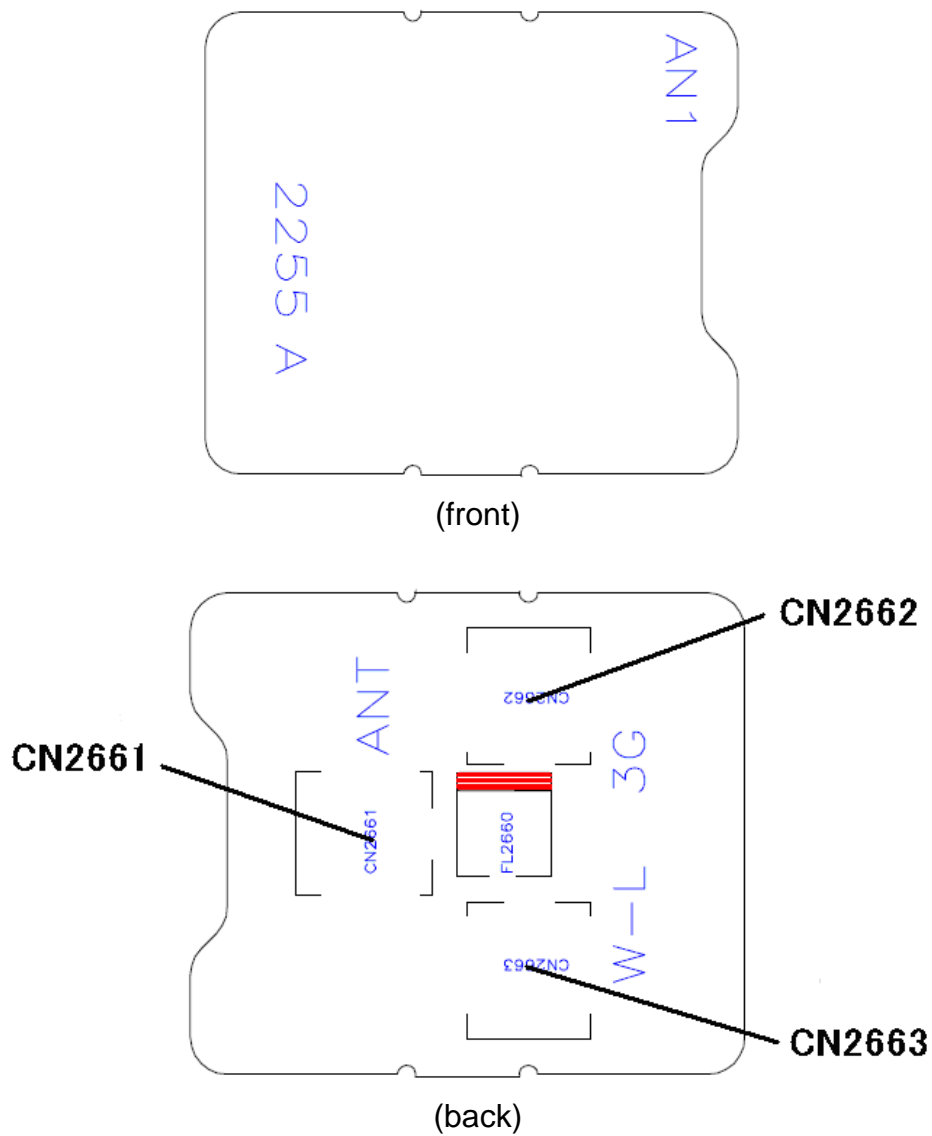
Antenna board(F WGAN*) layout (front/back)
